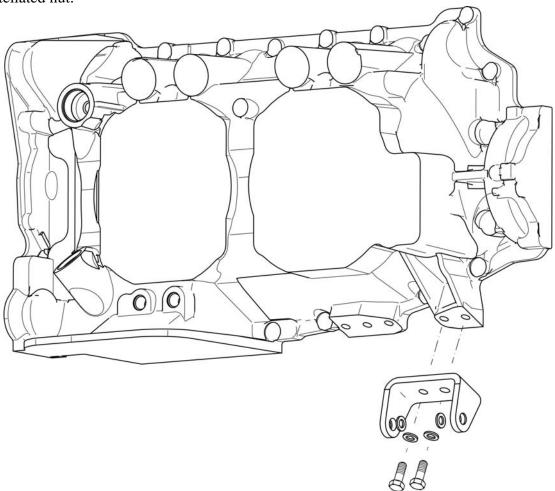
Illustrative Example of Single Alternator Attaching Bracket
